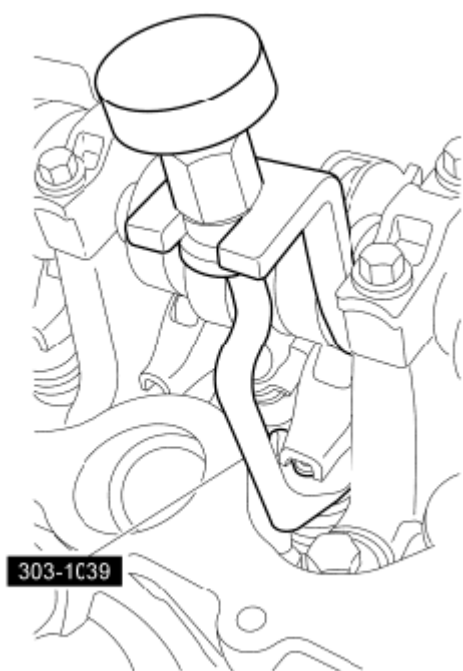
Identifying No. 5 Cylinder Camshaft Exhaust Lobe
